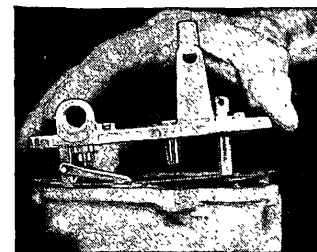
Install bowl cover as assembled, and gasket. Press pump cylinder gasket (crank ring) in recessed portion of bowl cover before installing. Use new bowl cover gasket
